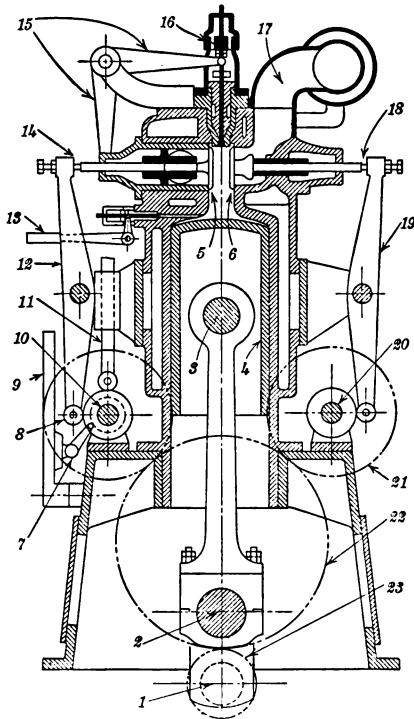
THE NEW LONDON SHIP & ENGINE CO. DIESEL ENGINE
